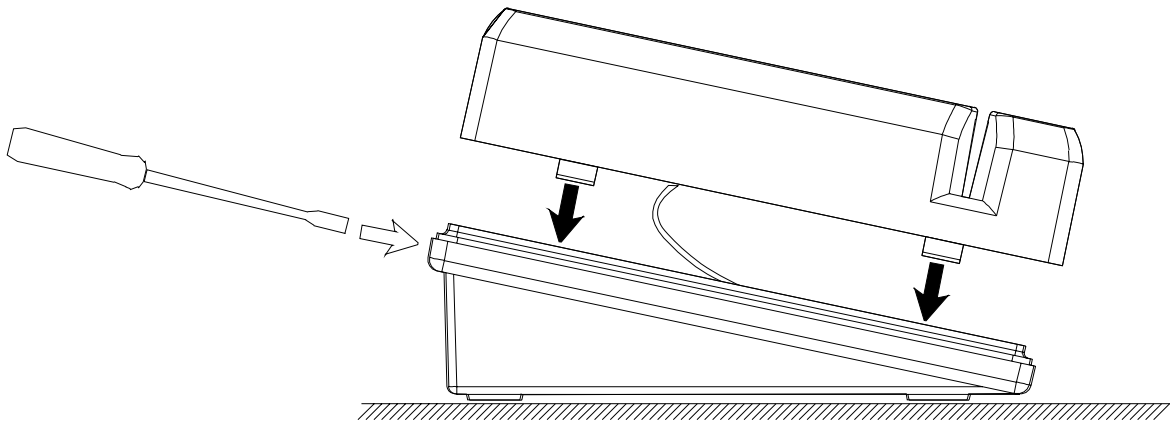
Closing the Terminal (Turnstile-Mounted Assembly)
